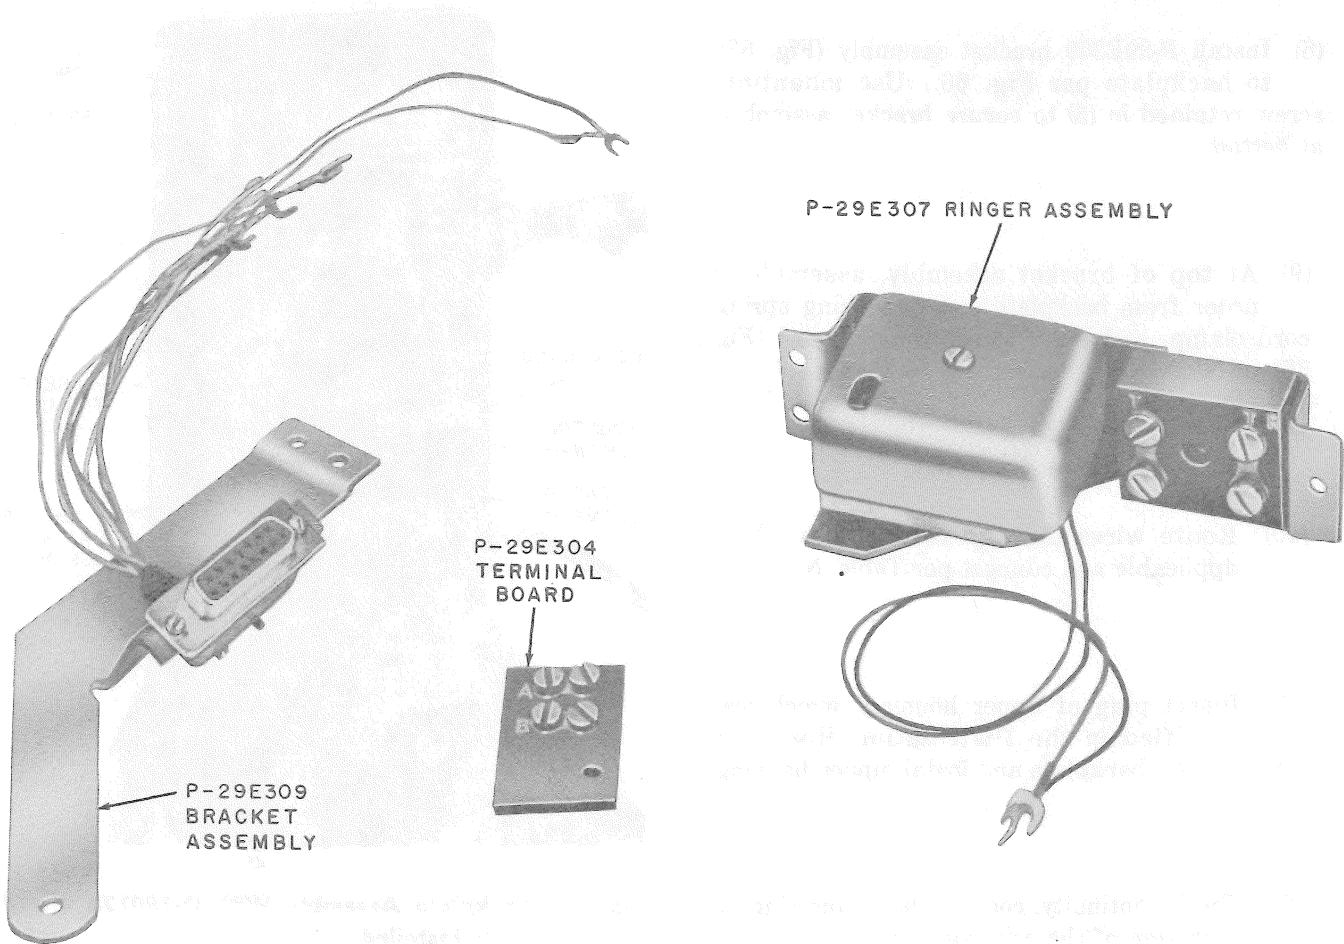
D-180120 Kit For Modification of Backplate Assembly
